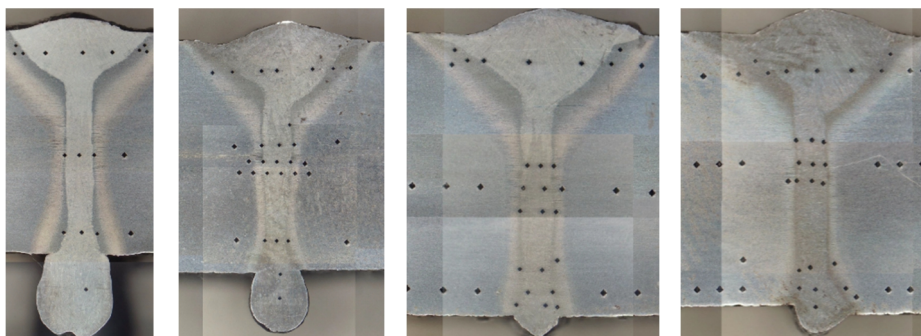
HLAW weld of 12 mm thick plates; a) no.1, b) no.3, c) no.4, d) no.5
